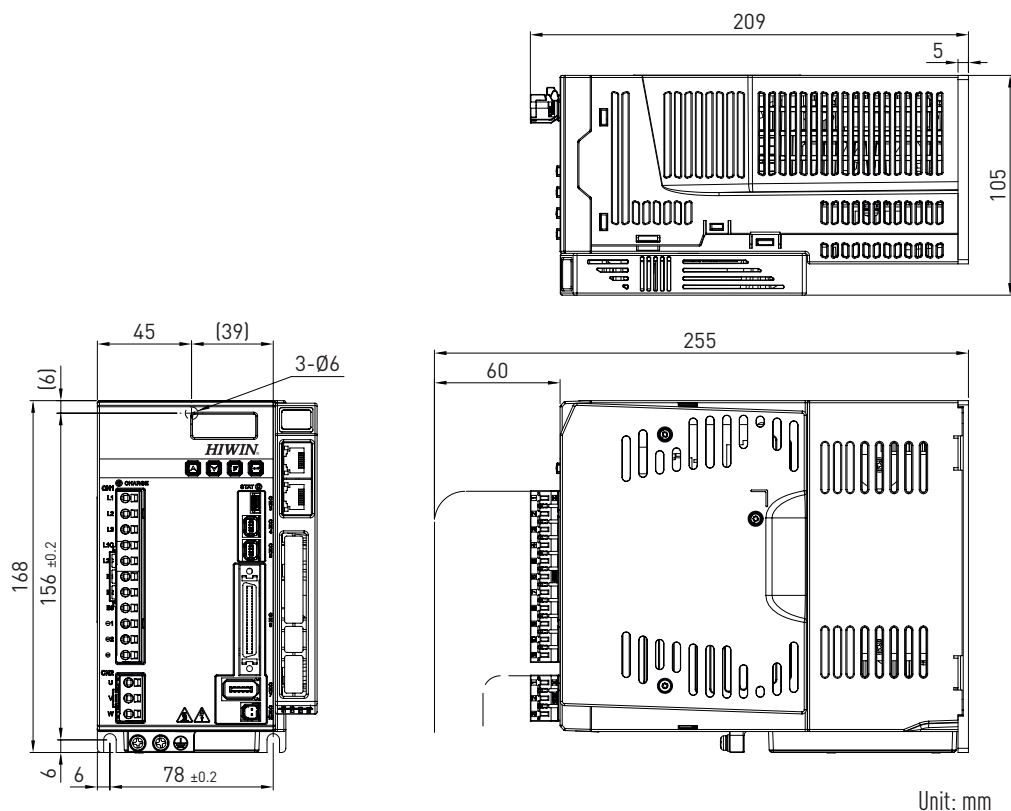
Dimensions D2(T)-20xx-F-xx and D2(T)-20xx-E-xx
